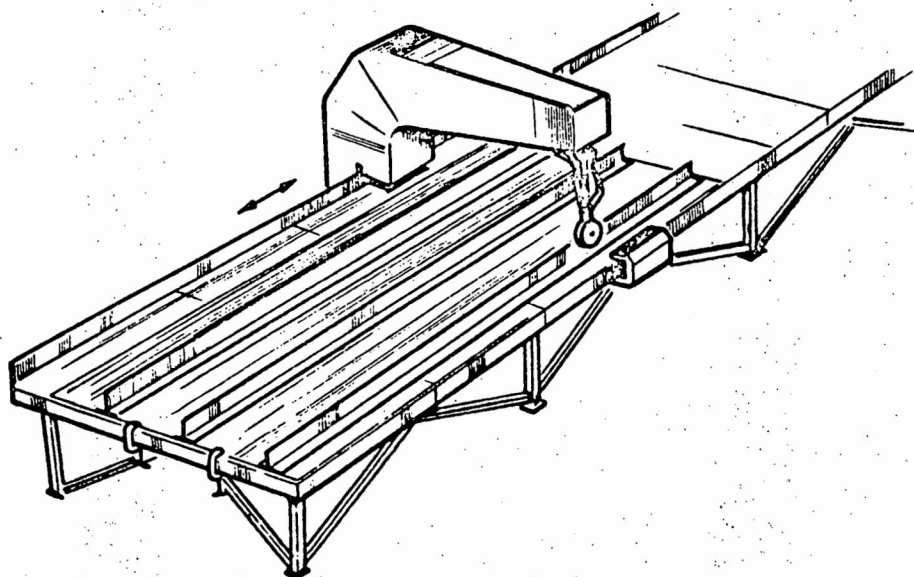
Typical Carriage-Mounted Welding Machine
